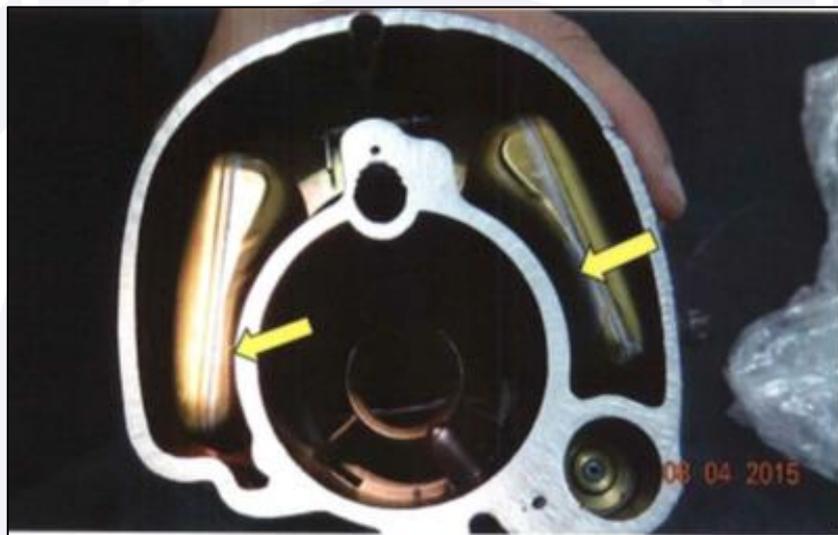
View of the tool assembled on the carburetor cap, according to Installation Instruction E-1002, showing that the float was not centered inside the tank.
